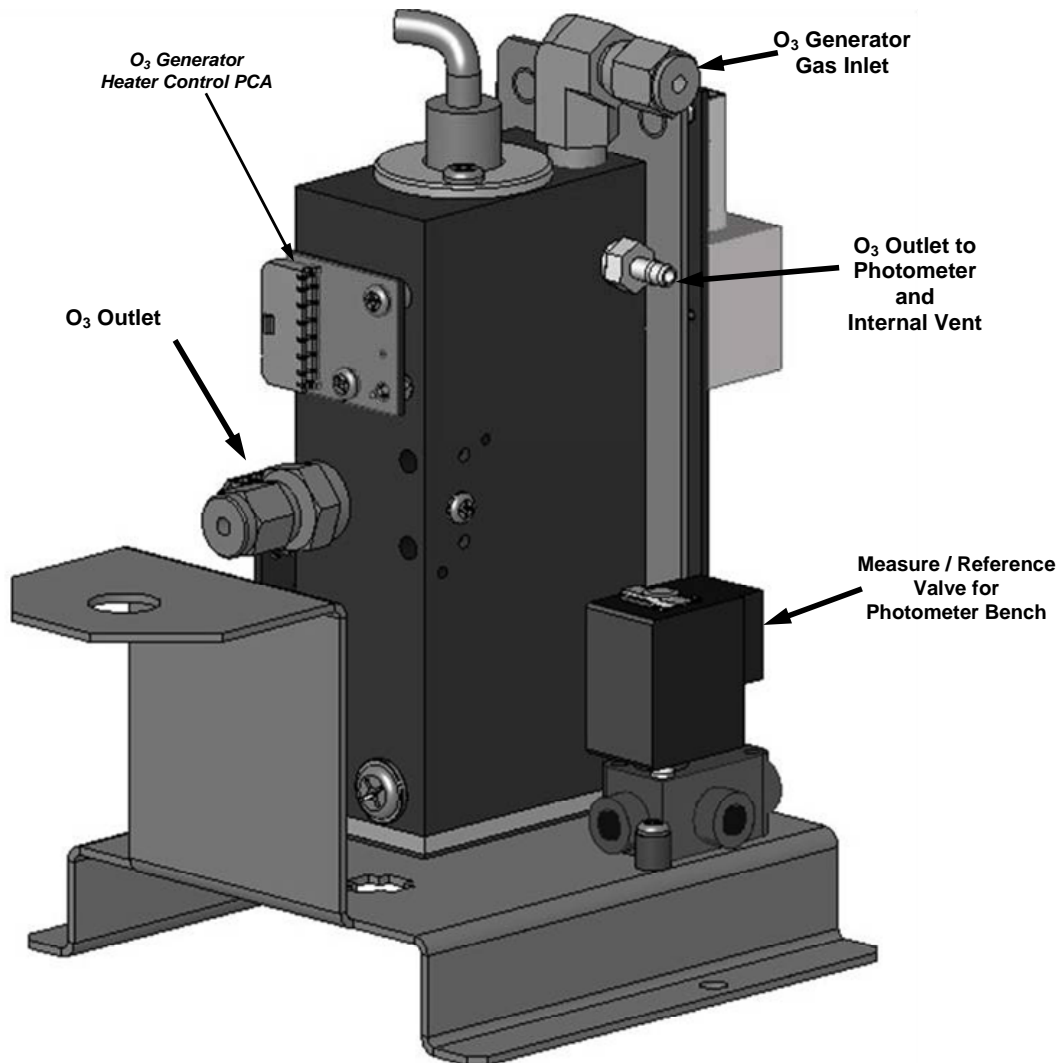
O₃ Generator Valve and Gas Fixture Locations
